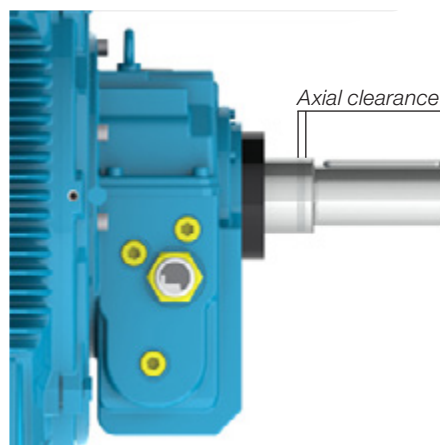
Axial clearance of motor designed with sleeve bearing
